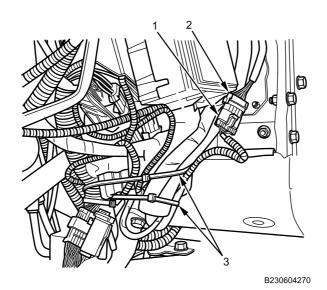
PDC Harness Cable Lock Straps and Wiper Motor Harness.
